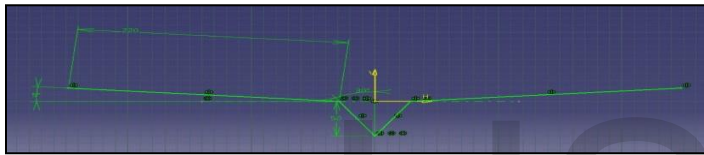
Base plate design for Dry channel and wet channel; Front view
